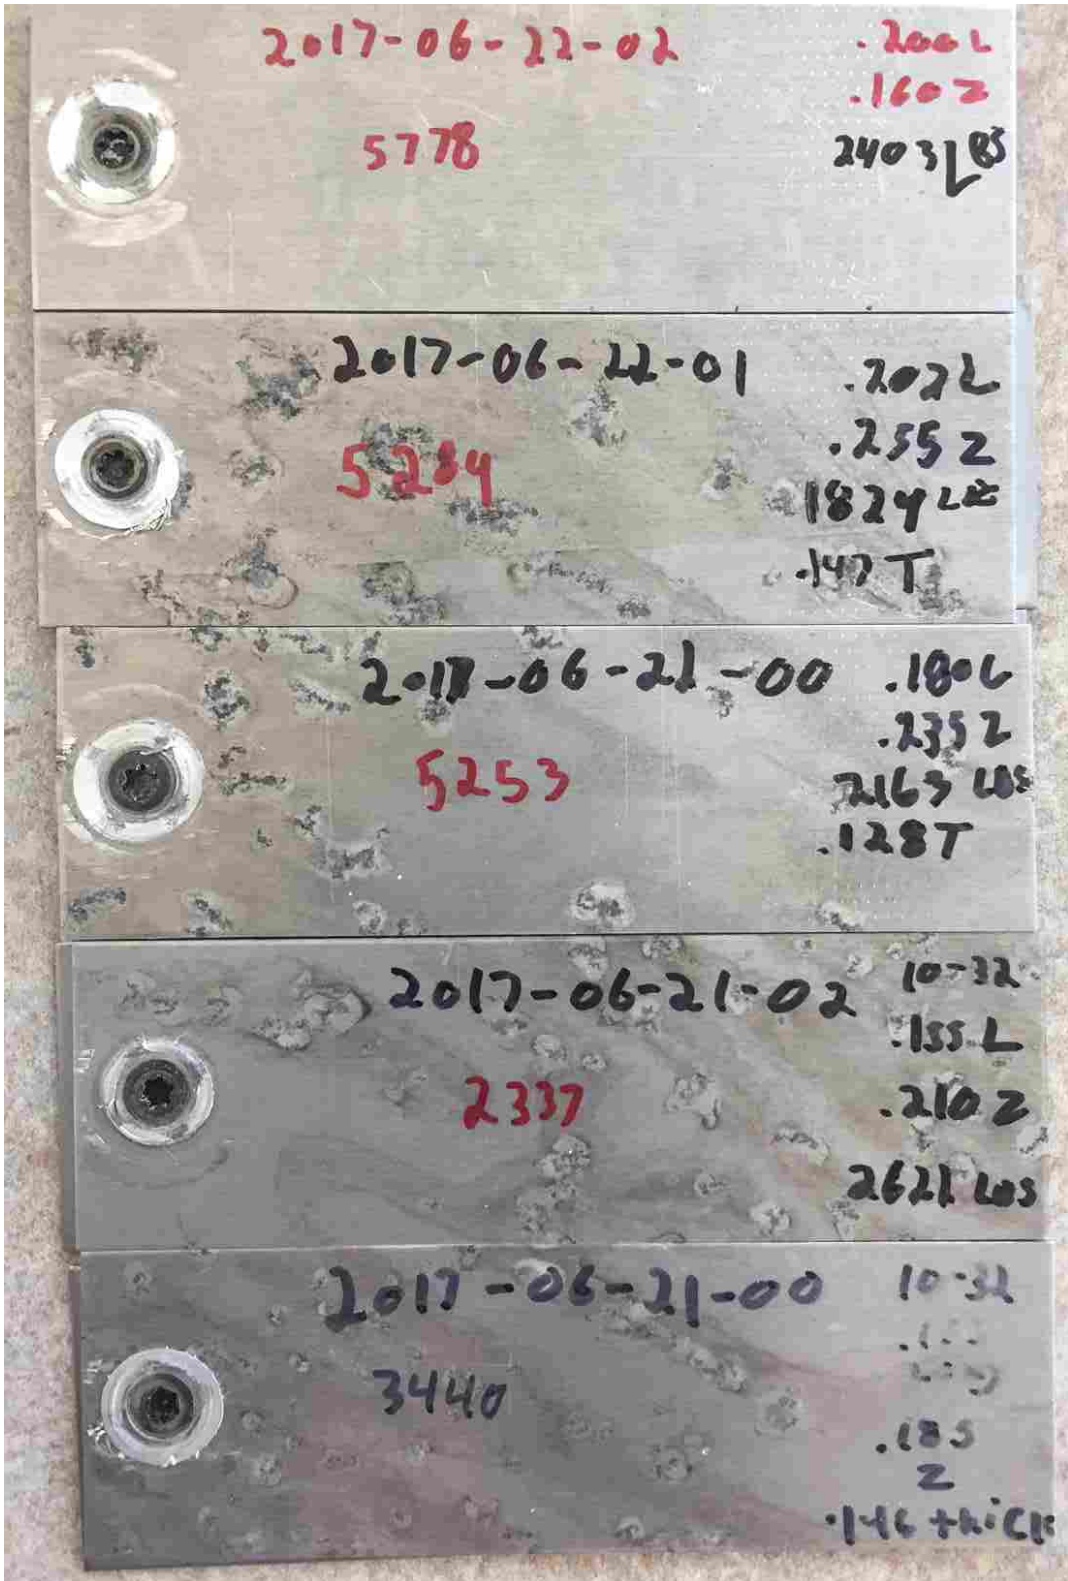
Proof-of-Concept Flush Joints Made with Machine Screws
